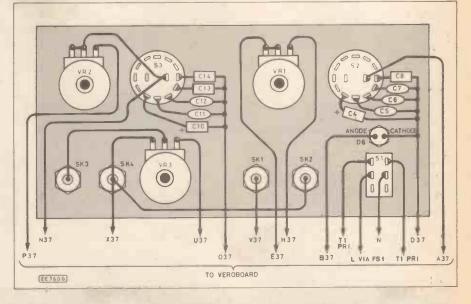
Rear of front panel wiring and details of wiring to the circuit board and power supply transformer.
